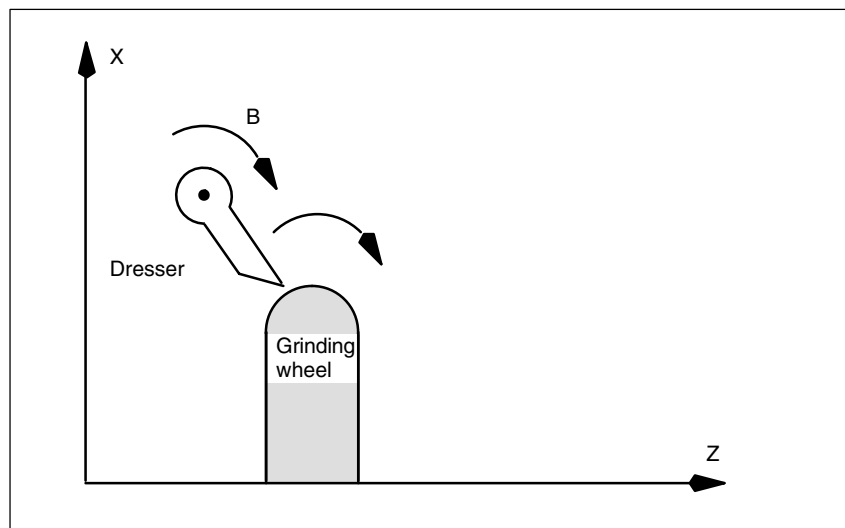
Positioning of a dressing tool on a grinding wheel
